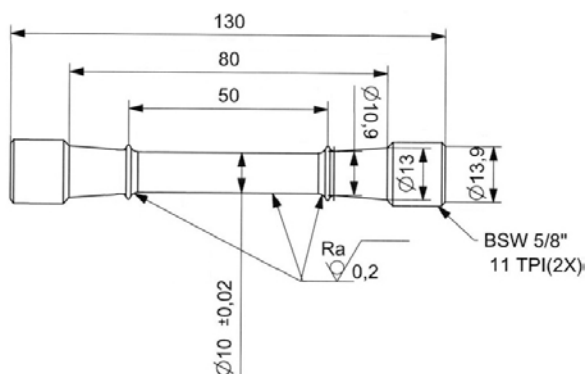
Specimen geometry for the cross-weld specimens.
